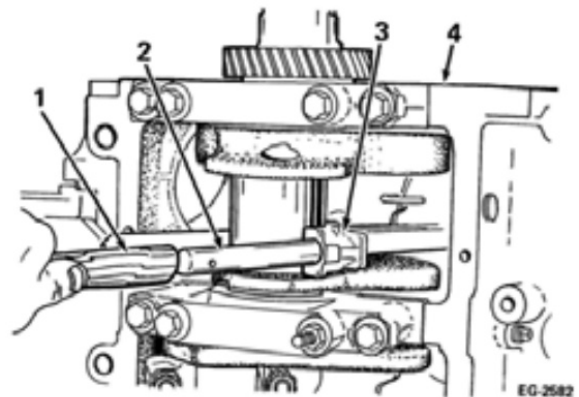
Pushing the Old Style Connecting Rod and Piston Out Of the Cylinder Bore
